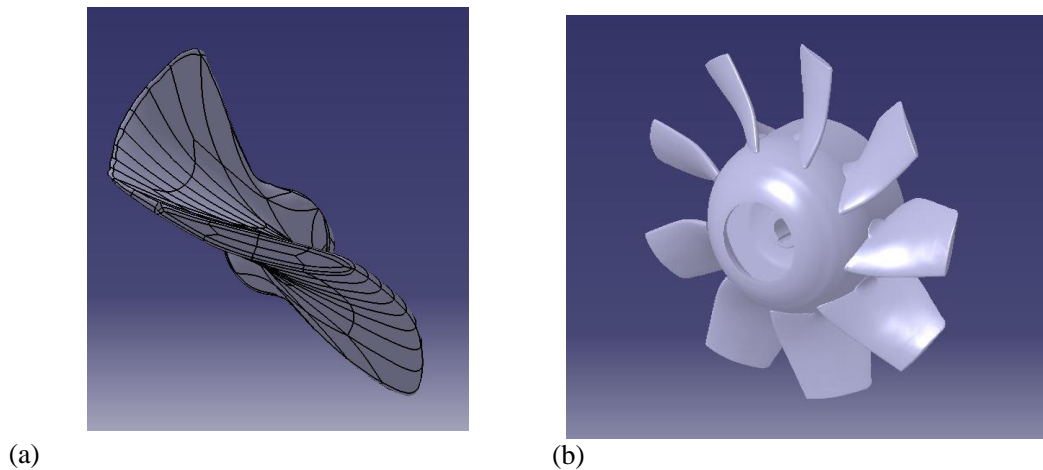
a) Scanned impeller blade. Imported to the software CATIA; b) Modeled axial fan impeller geometry
